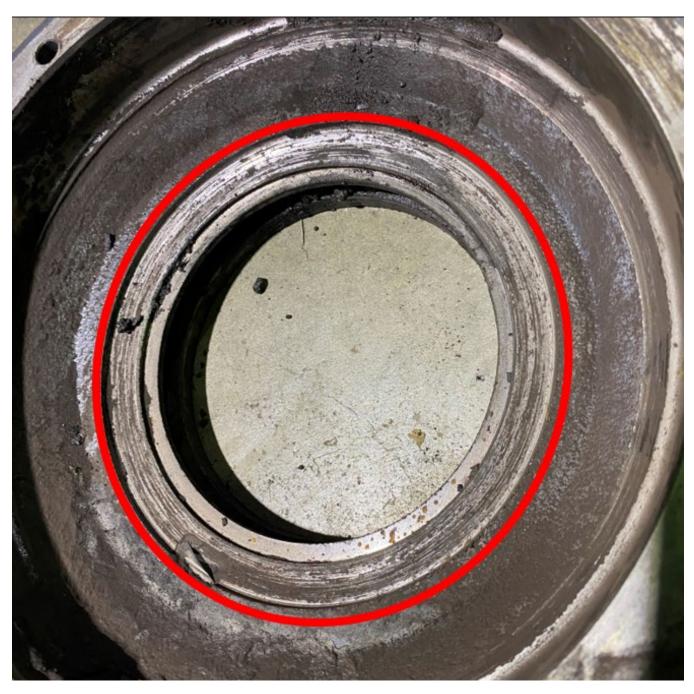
Red circle showing grooved mark on the inside of the end cap created by interference with the rotating step-drive main-shaft alignment flange.
